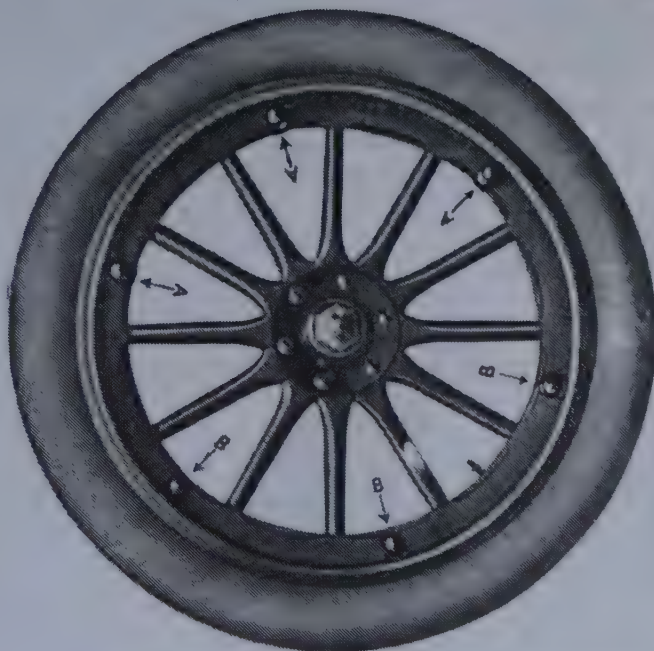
Wheel Fitted with Standard Universal Quick-Detachable-DEMOUNTABLE Rim with Clamp Lock, Showing Three Clamps Unlocked (A) and Three Locked in Position (B.)
